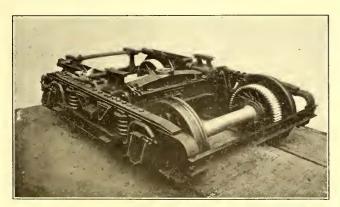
TRUCK FOR CENTER PIN LOAD OF 28,000 LB.; WHEEL BASE, 80 IN.
